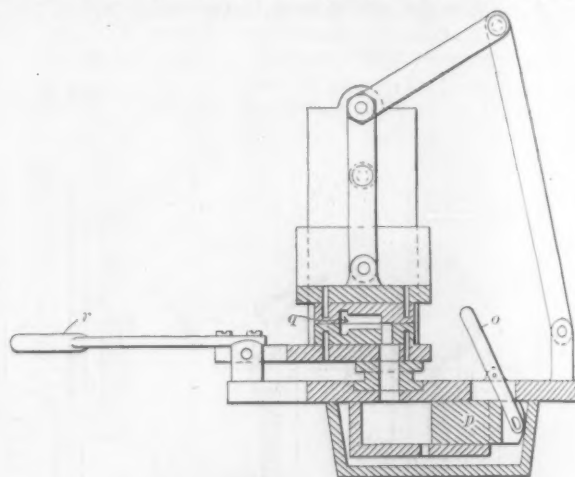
One of the Earlier Types of Die-Molded Casting Machines.
